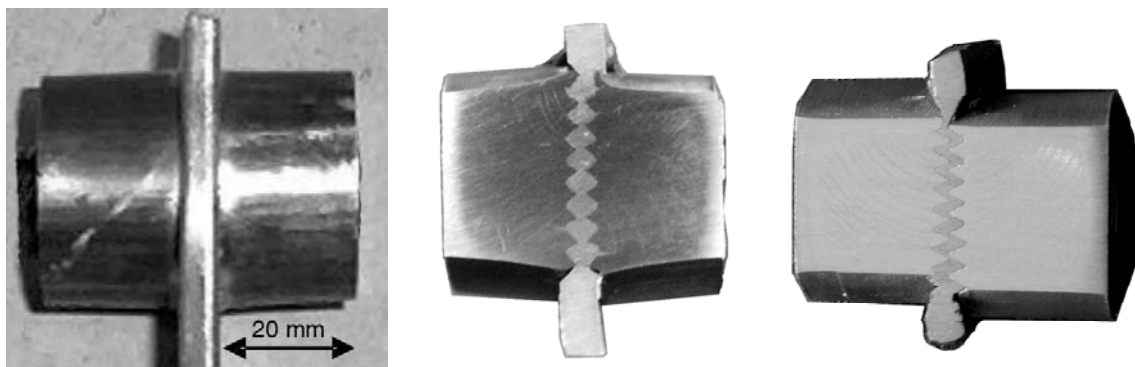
Cold welding samples with Al and Pb intermediate layer.
